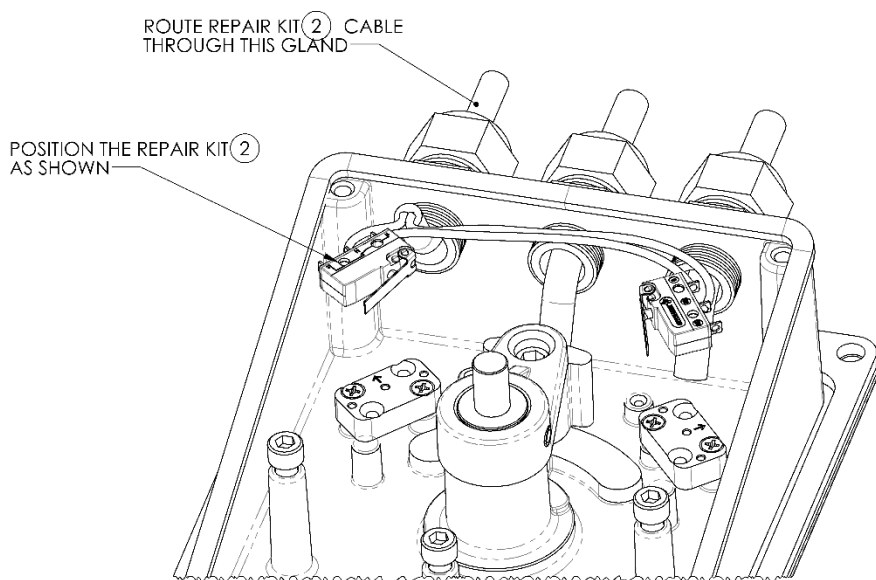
Routing the cable for 7171-RF-01 / 7171-RK-01
